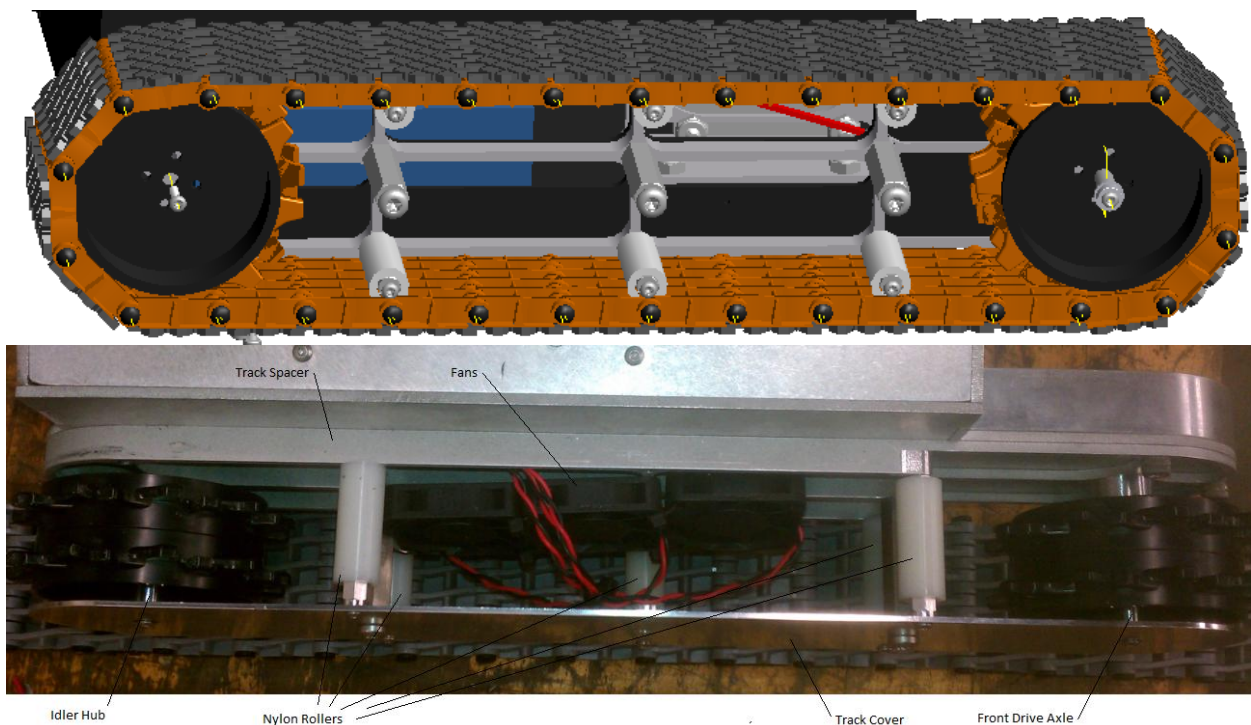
Lynxmotion tracks and sprockets used on the inspection tool.
